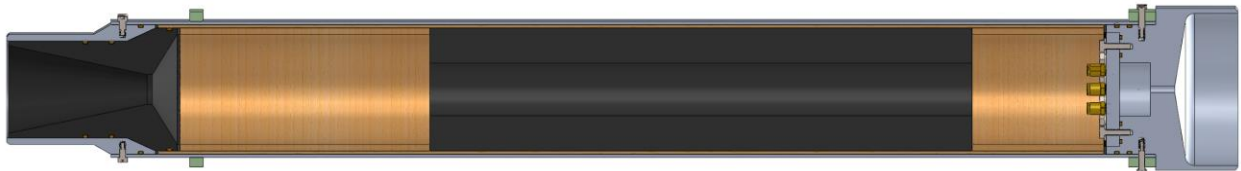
Thrust Chamber Assembly and Injection Assembly (cross-section view)
